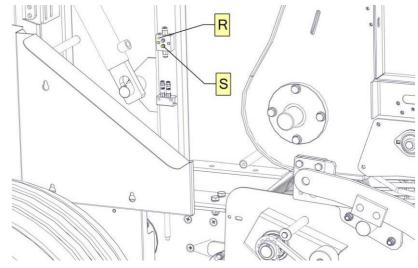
The bearing central lubrication system on the right-hand side of the baler
